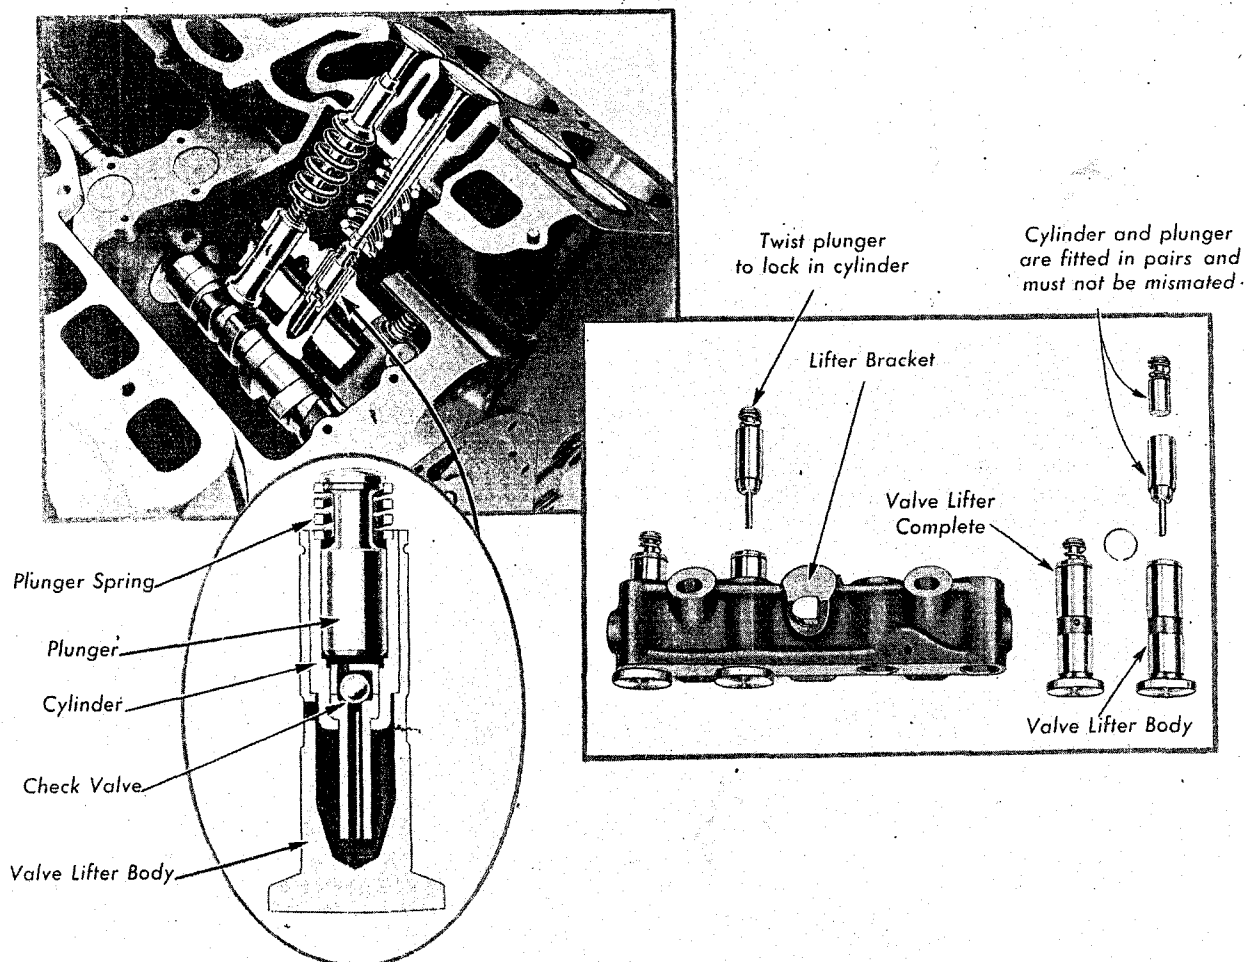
Arrangement of Valves, Valve Lifters, and Silencer Parts
